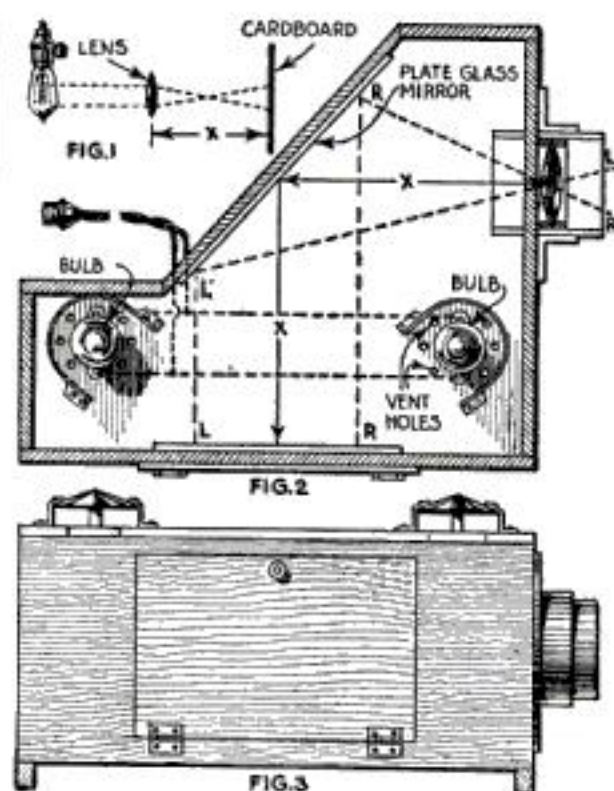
shows method of testing focal length of lens; Fig. 2, the projector with top removed; Fig. 3, the side view
